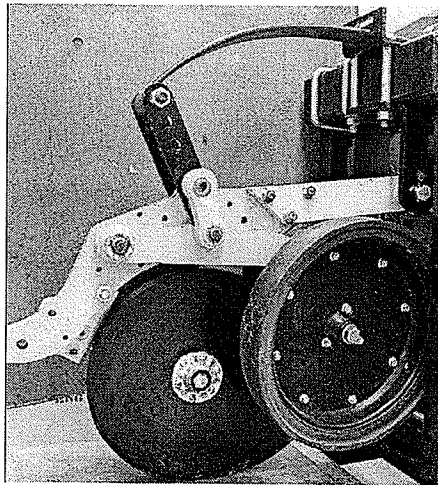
Assembly of first prototype mounted on a toolbar.
